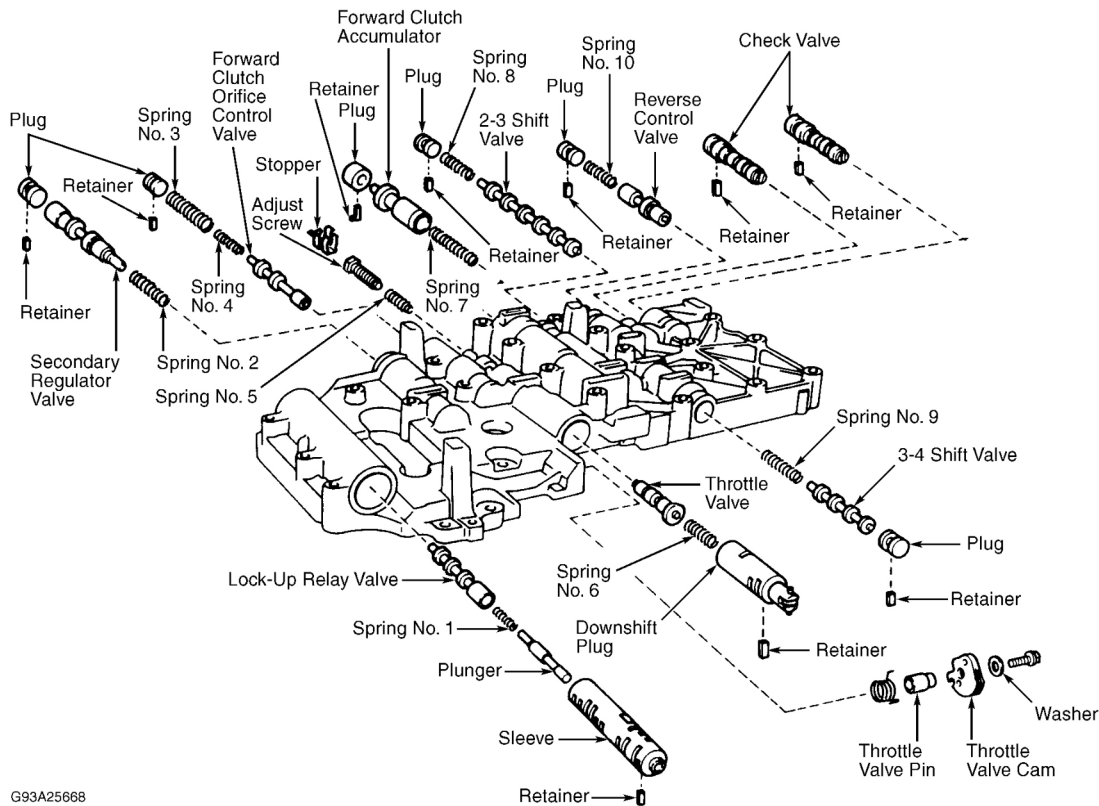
Exploded View Of Upper Valve Body (A-341E)
